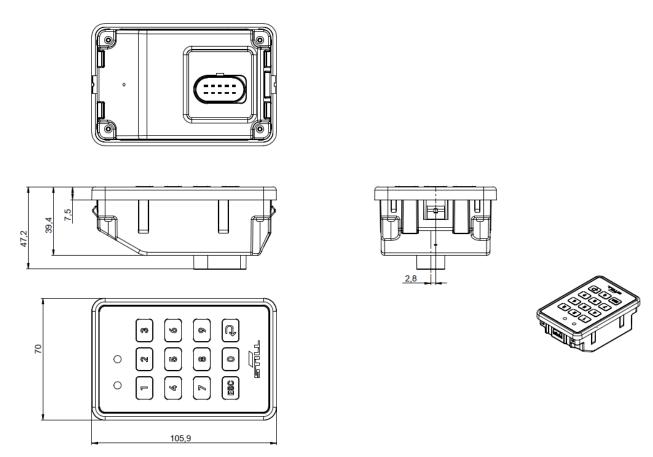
Mechanical Dimensions - KAP-K-UNI-KPL-S; KAP-K-UNI-KPL-L is the identical device with different imprint
